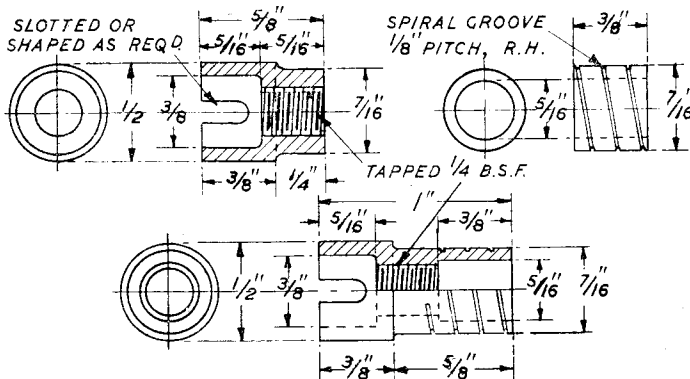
Coupling and oil retainer sleeve, showing (below) an alternative fitting combining both components
